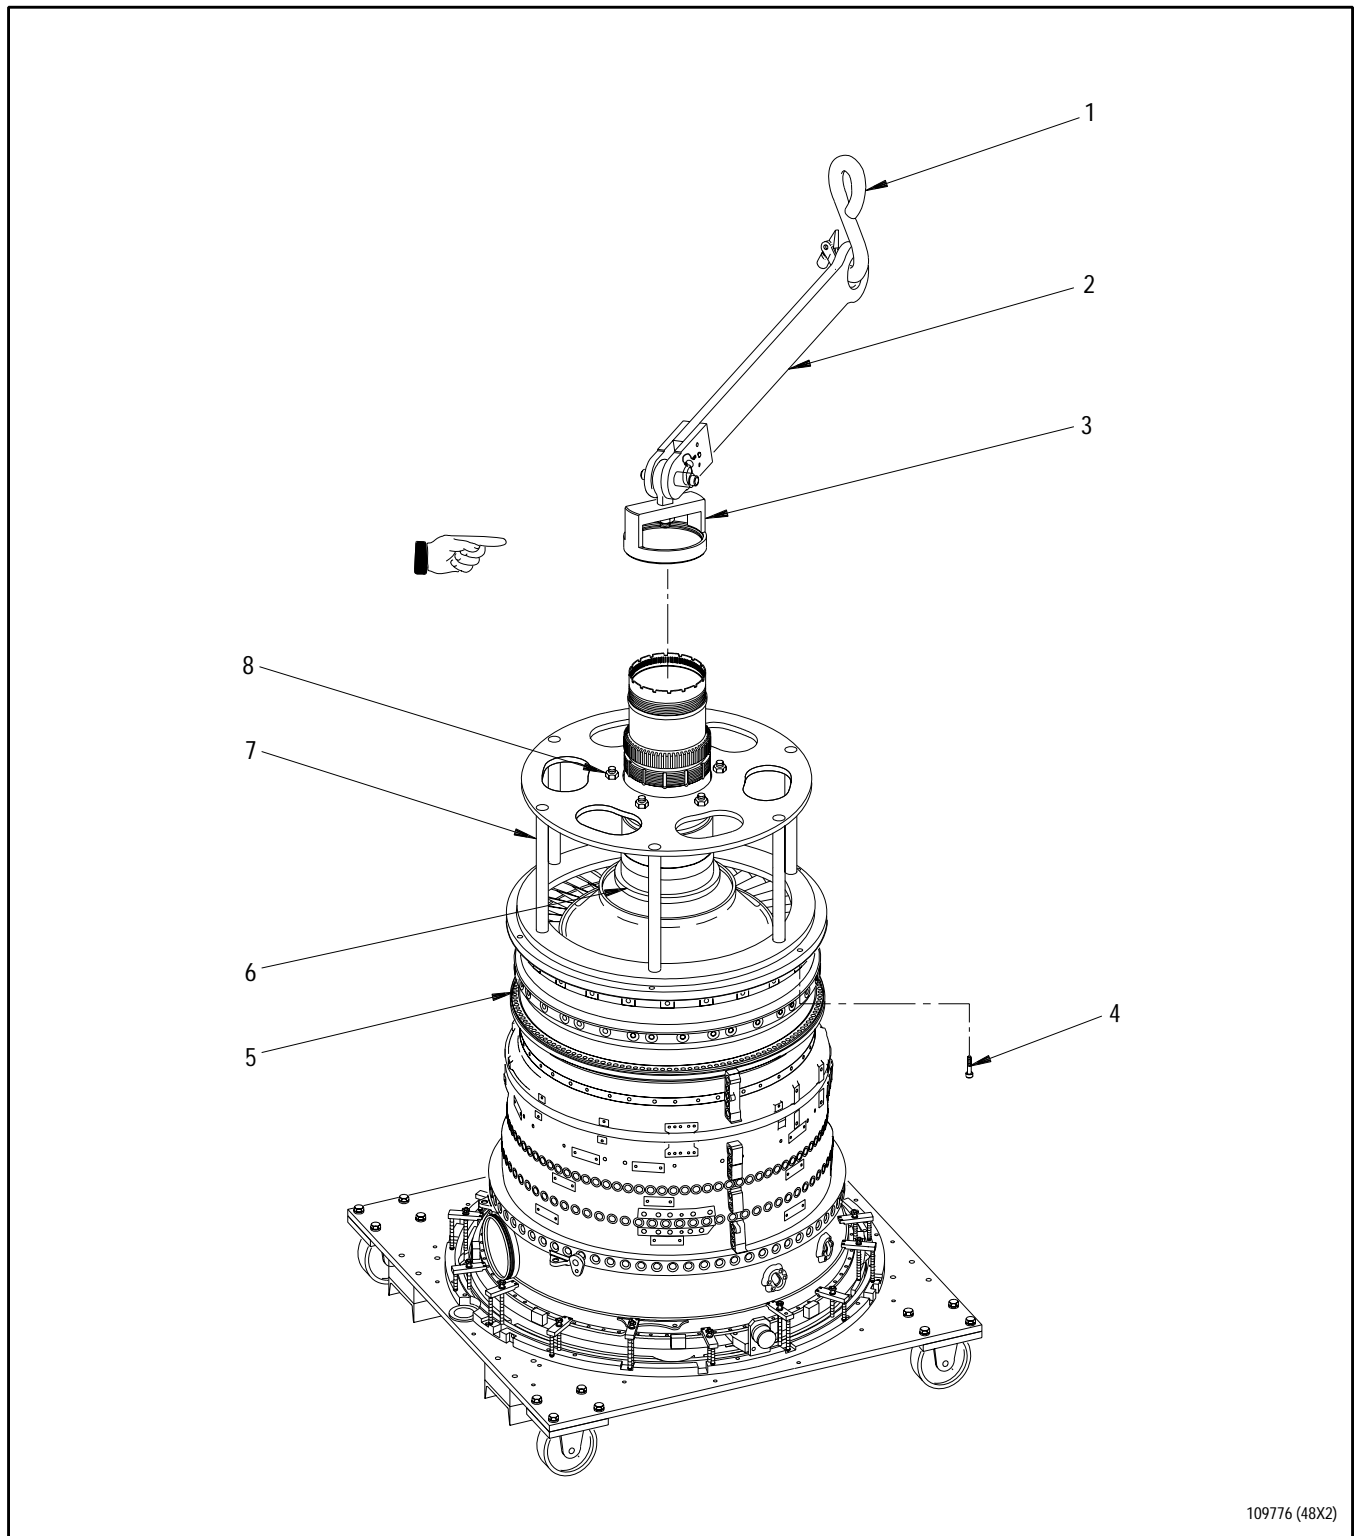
PWA 57722 Stand Detail-19 Support Plate Assembly - Installation
